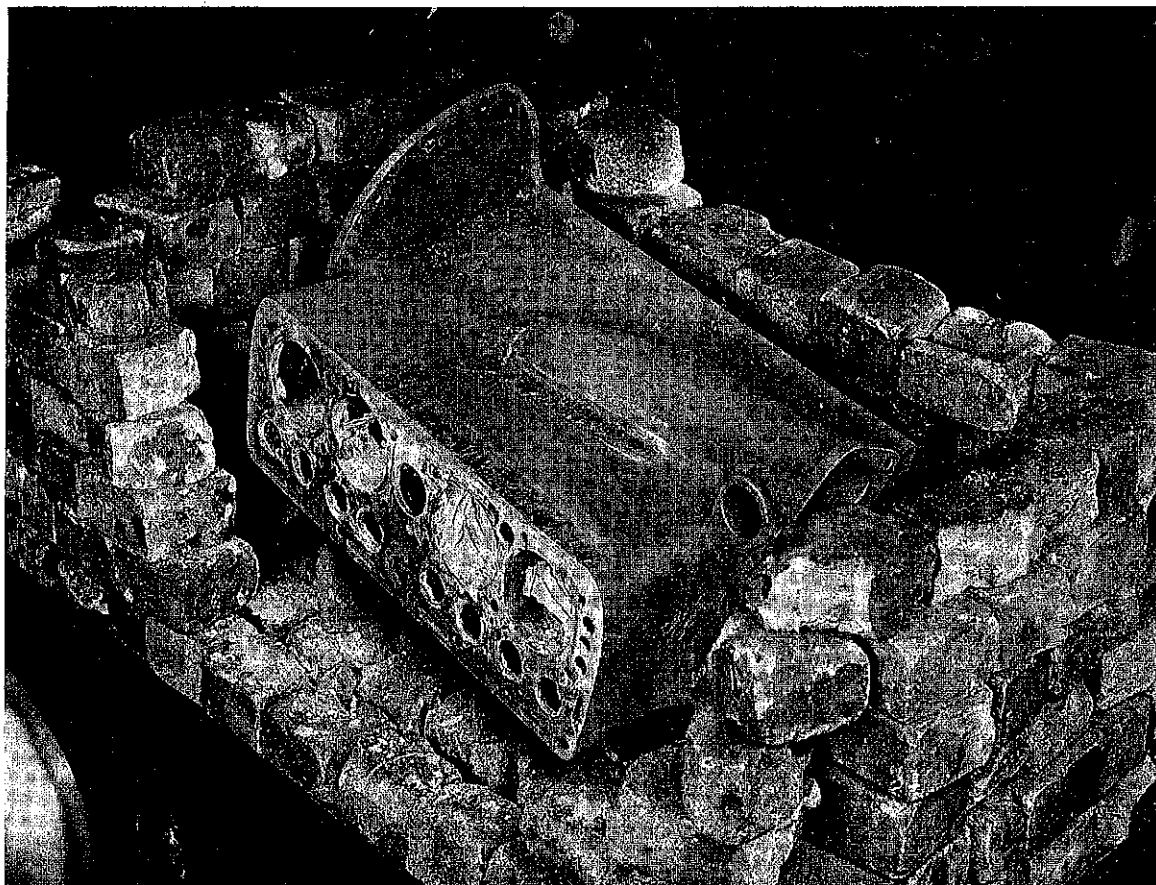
CRACKED TRACTOR CYLINDER BLOCK REPAIRED BY BRONZEWELDING.
